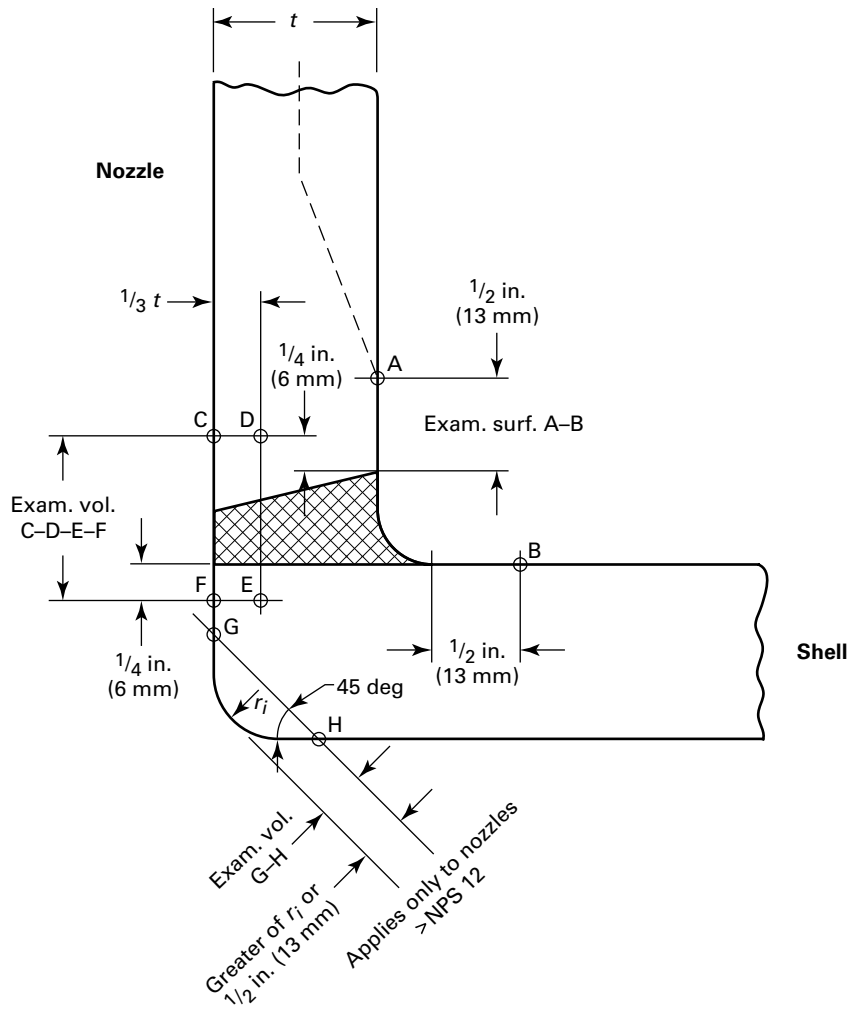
NOZZLE-TO-VESSEL WELDS (CONT'D)
